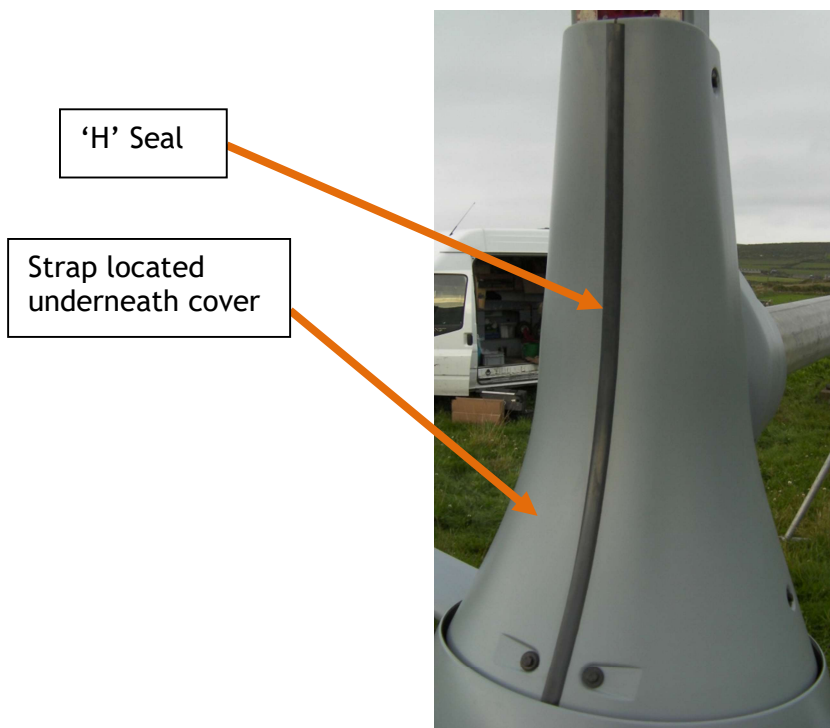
Fitting and Assembly of Rear Cover 'H' Seal and Straps
